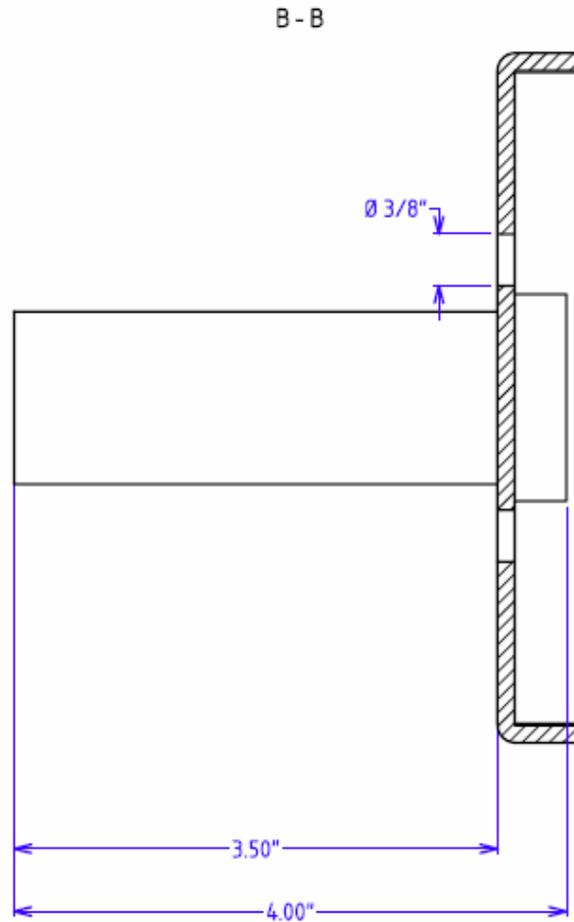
Zoomed in drawing of 4x4 Primus post anchor (top-and side view)
